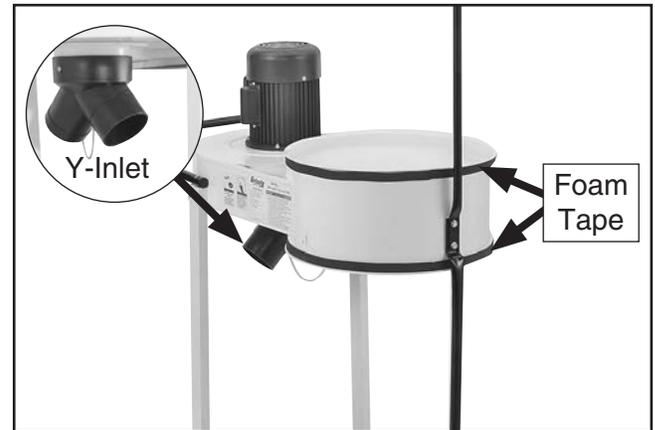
Y-Inlet and foam tape attached to impeller housing.
